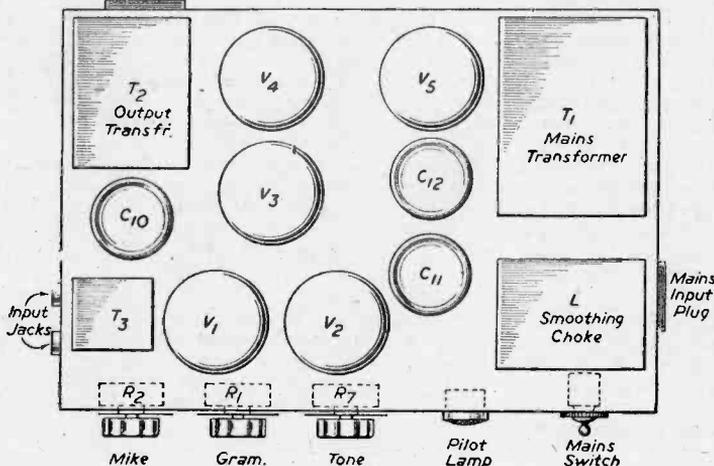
Typical component layout. Plan view, looking down on chassis.
